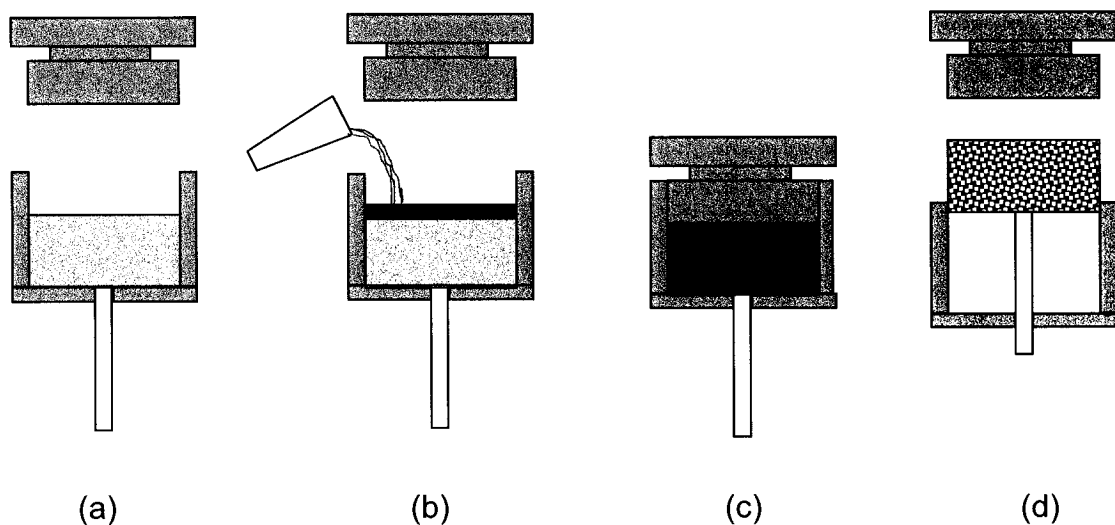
Schematic diagram of the squeeze casting processes (a) Step 1, preheat, lubricating tools. (b) Step 2, transfer melt into die cavity. (c) Step 3, solidify melt under pressure. (d) Step 4, eject casting.
